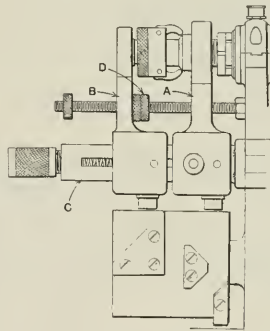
STOCK-FEED MECHANISM OF THE "EMPIRE" AUTOMATIC SCREW MACHINE
